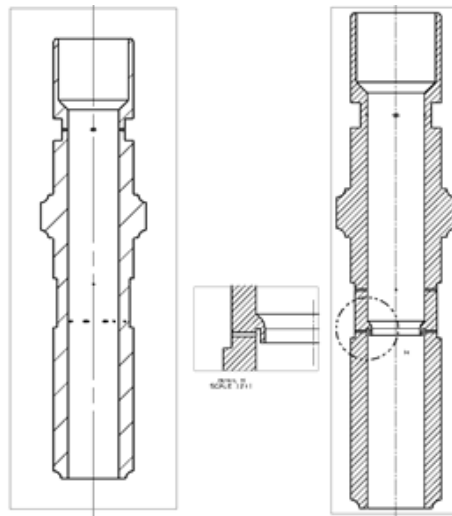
Original and modified cross-sectional views of thruster combustion chamber
